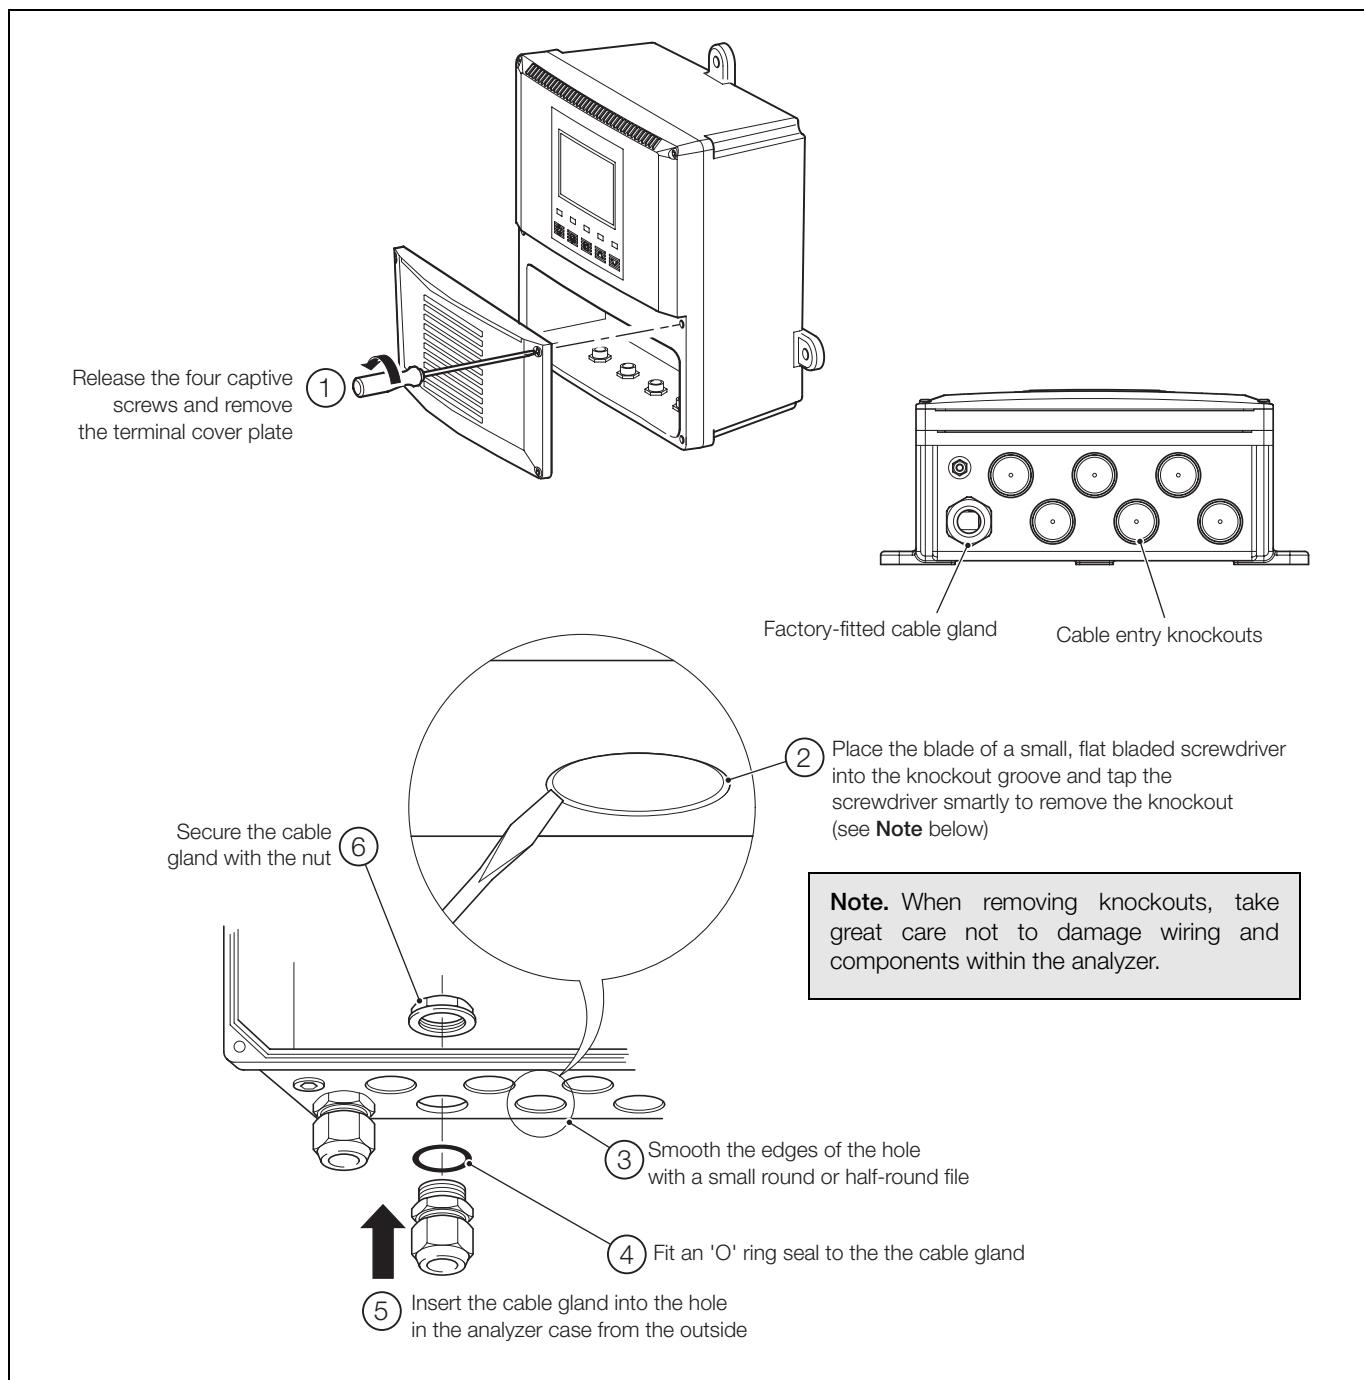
Cable Entry Knockouts, Wall-/Pipe-mount Analyzer
